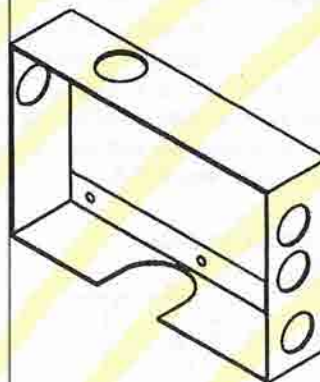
Model MB-P2 – Control Head Mounting Bracket.
